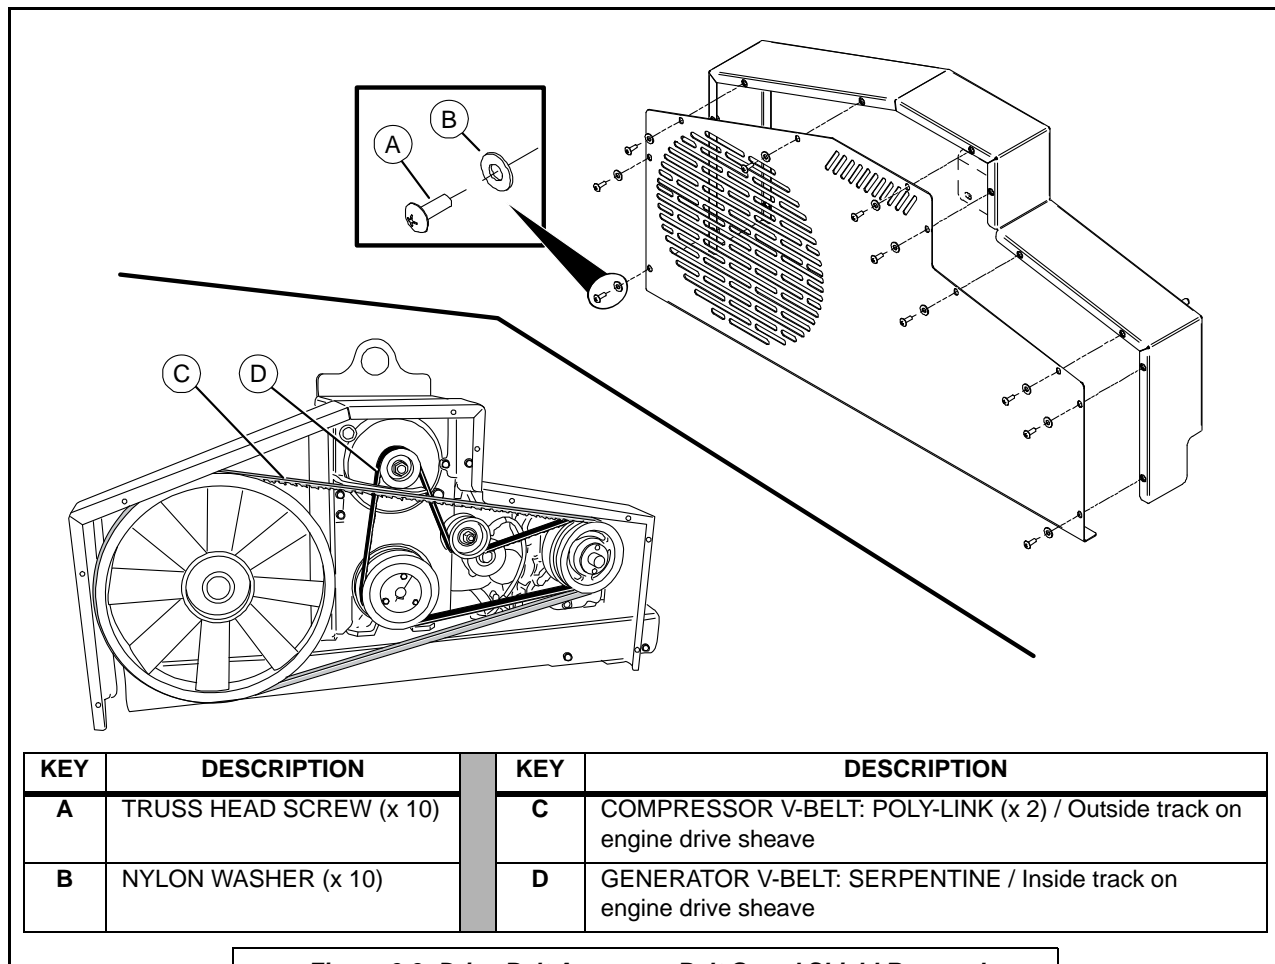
Drive Belt Access — Belt Guard Shield Removal
